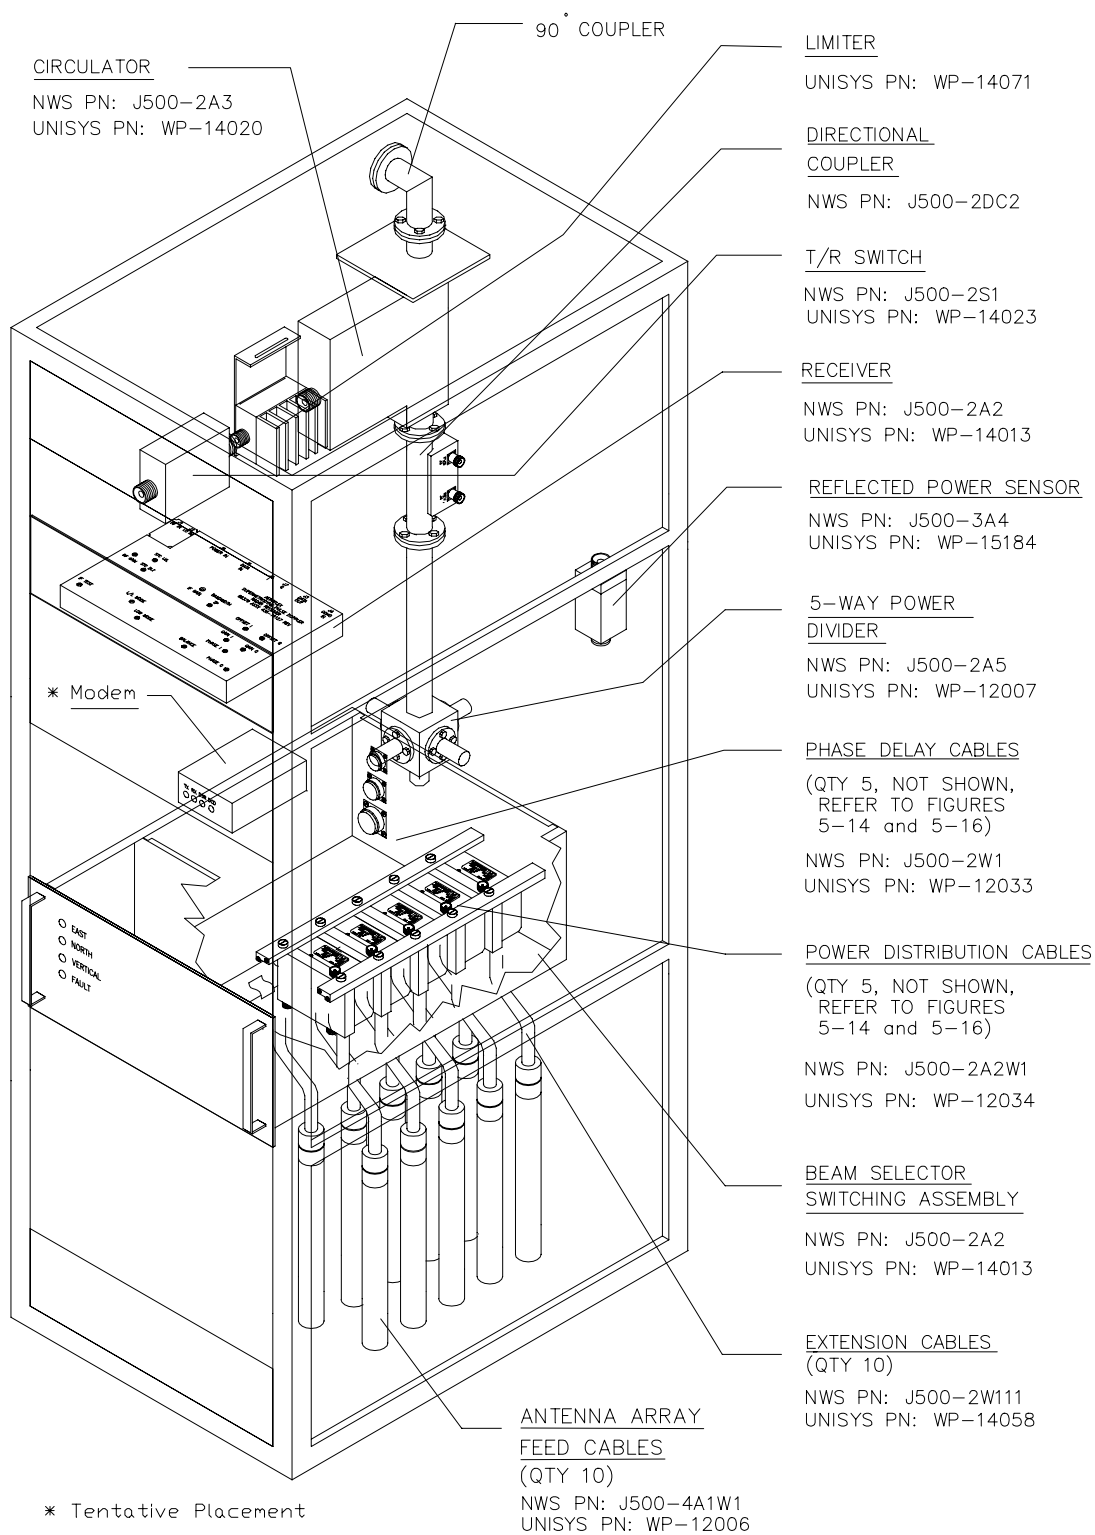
Beam Steering Unit (BSU) Cabinet Internal Component Layout
